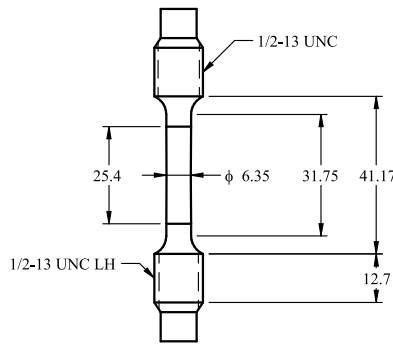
Hot tensile specimen: Schematic of sub size No. 3 (ASTM E8-16).
